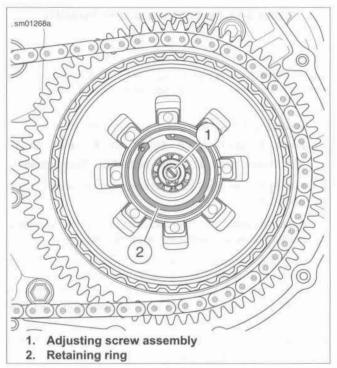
Clutch Adjusting Screw Assembly and Retaining Ring
